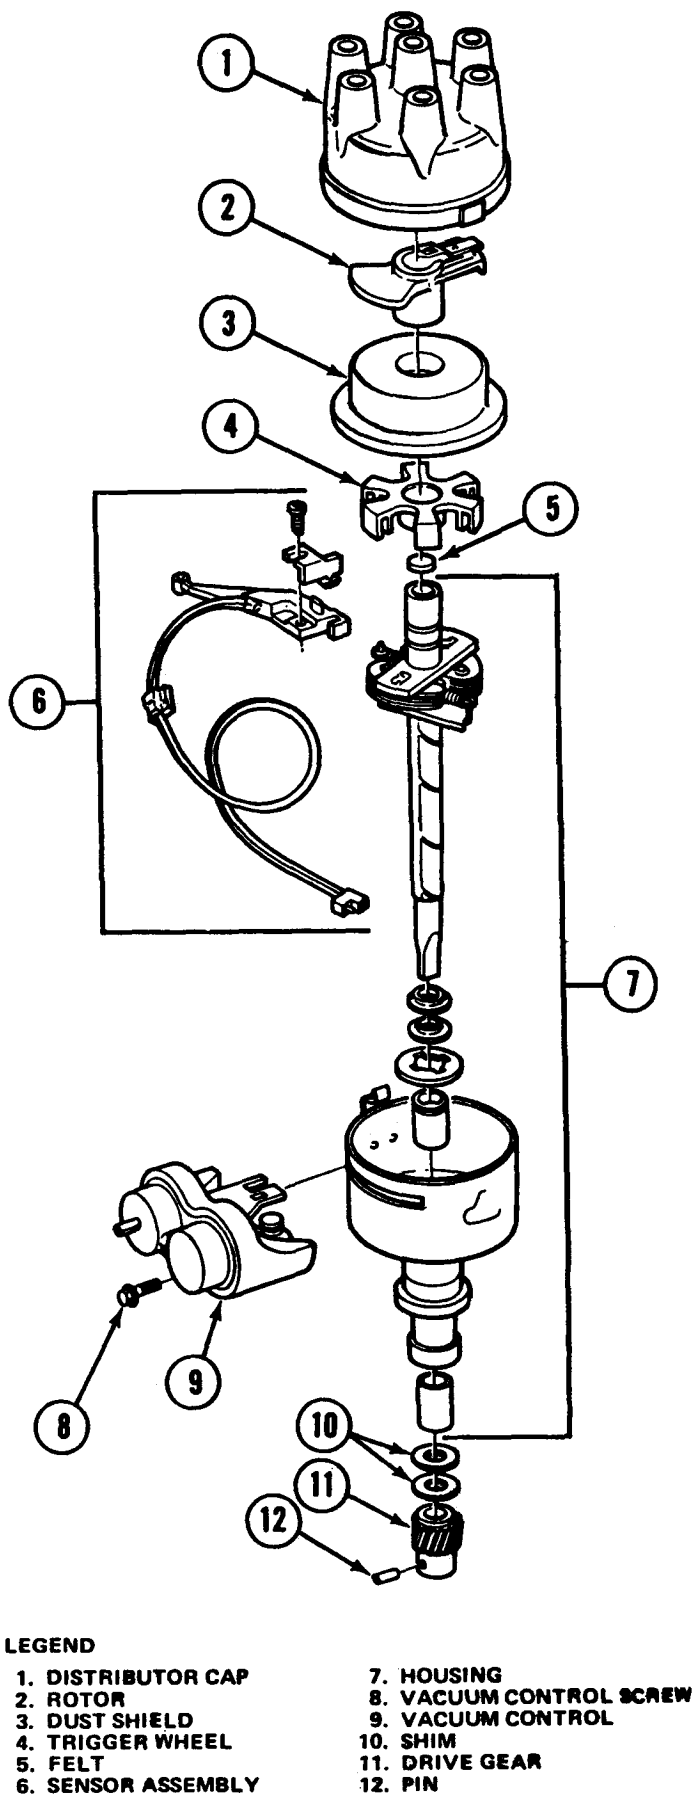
EXPLODED VIEW OF THE DISTRIBUTOR ASSEMBLY (6 Cylinder)
